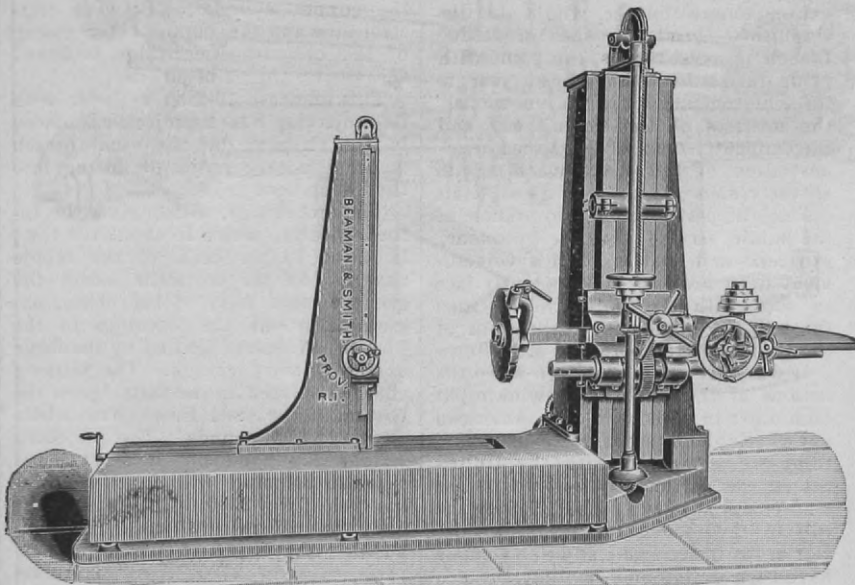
Horizontal Spindle Drilling and Boring Machine.
